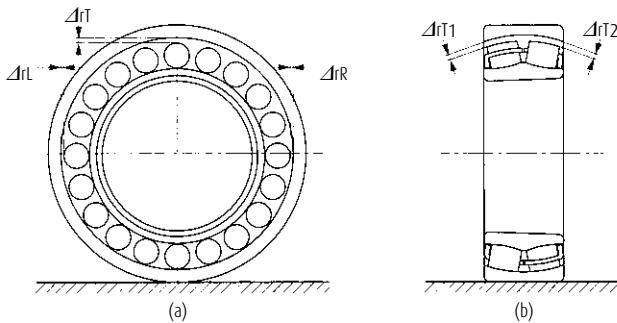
Clearance Measurement Point (Bearing Outside Diameter: Larger Than 200 mm)
